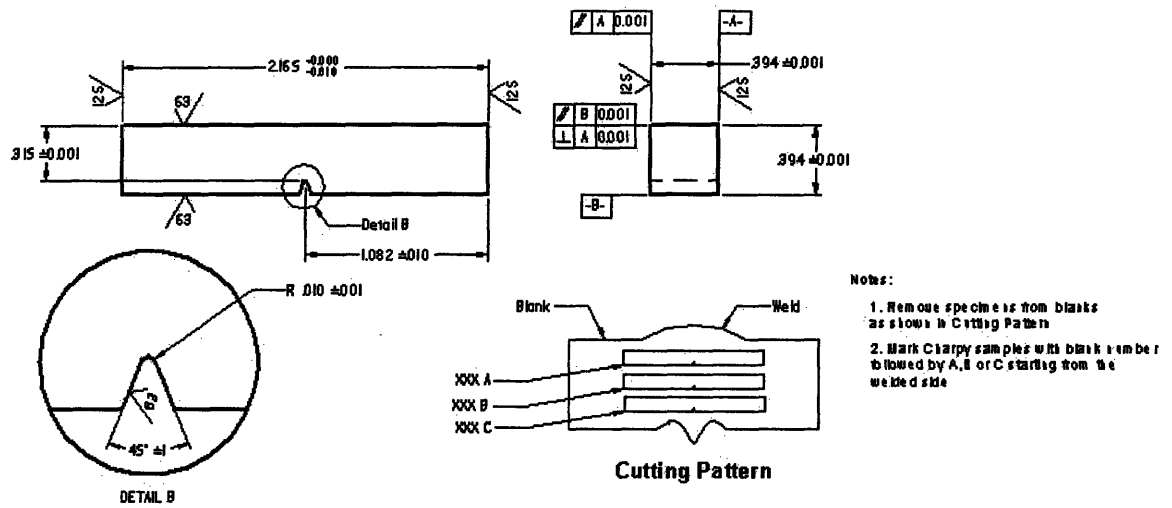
Charpy V-notch Specimens Drawings Showing Orientation with respect to the Weld
